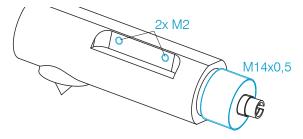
Mounting for series IFS2407/90-0,3 sensors
